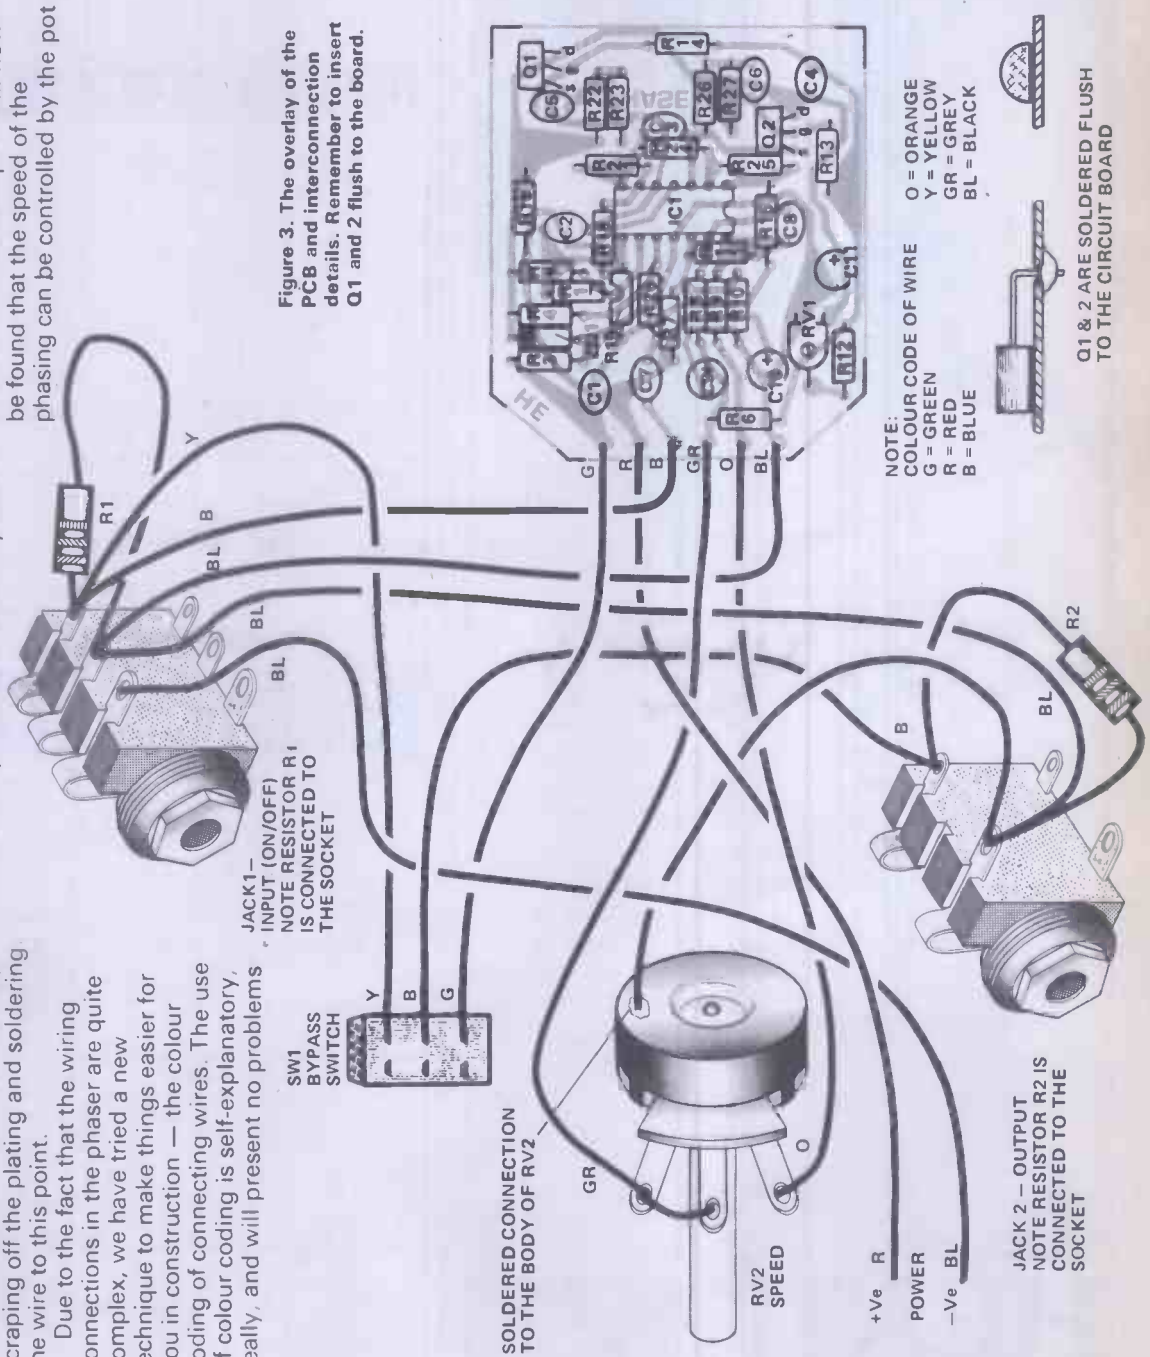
The overlay of the PCB and interconnection details. Remember to insert O1 and 2 flush to the board.
